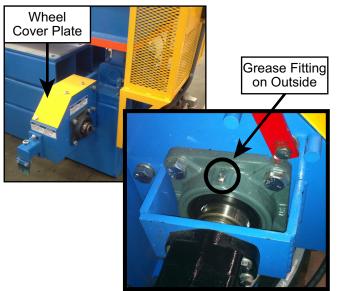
Lubricating the Drive/Idle Wheel Bearings
